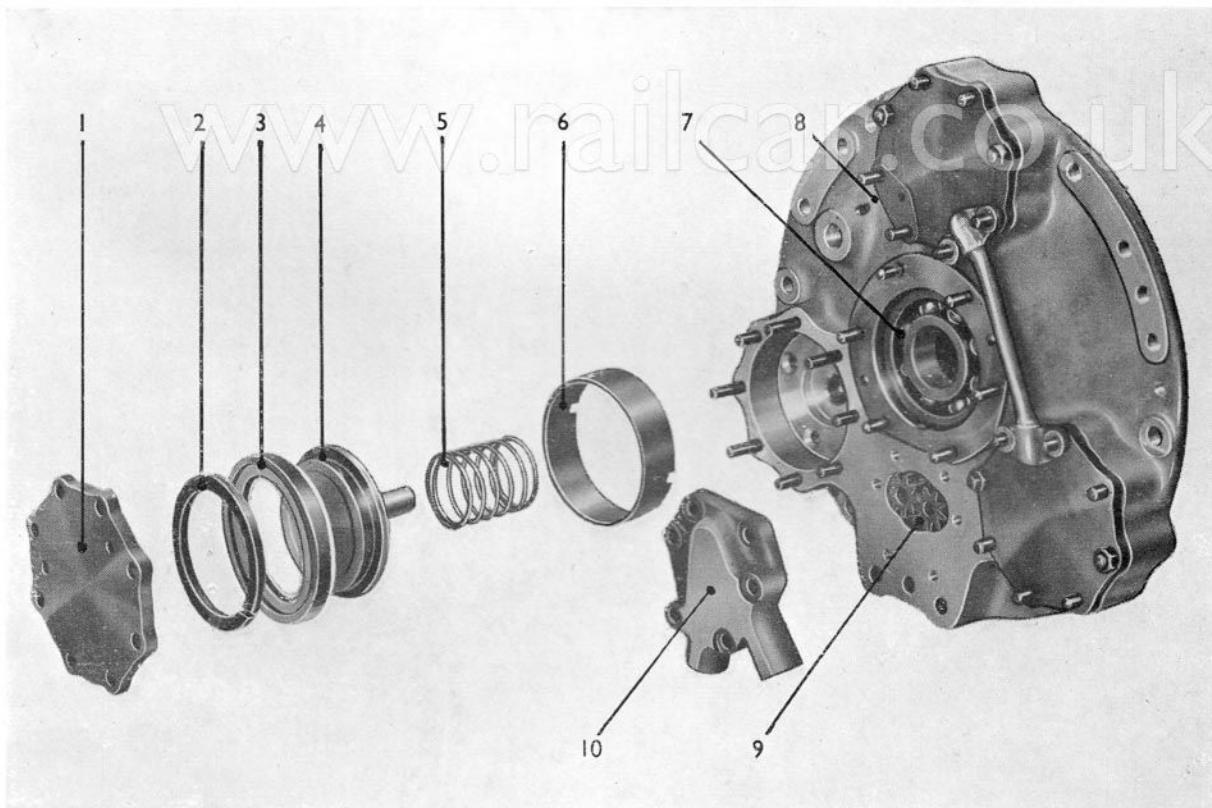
View of Top Speed Piston Assembly and Oil Pump
